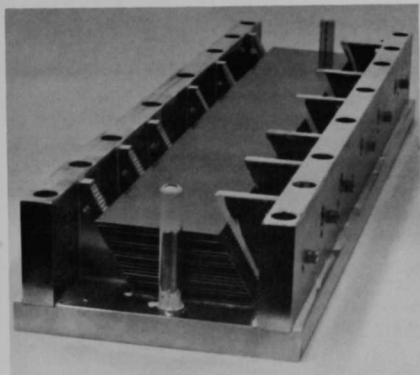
Partially Assembled Plate Assembly in Brazing Fixture
